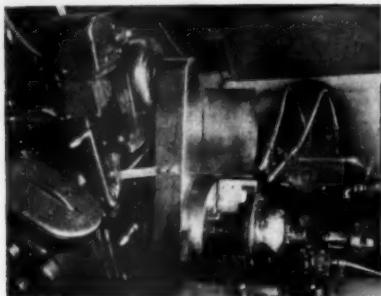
" Fay lathe tooled for rough machining all surfaces on differential case.
